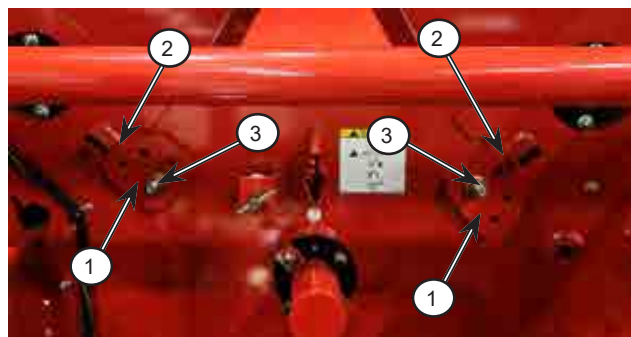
Feed Rollers Resting on Adjustment Plates (Rear Shown)
